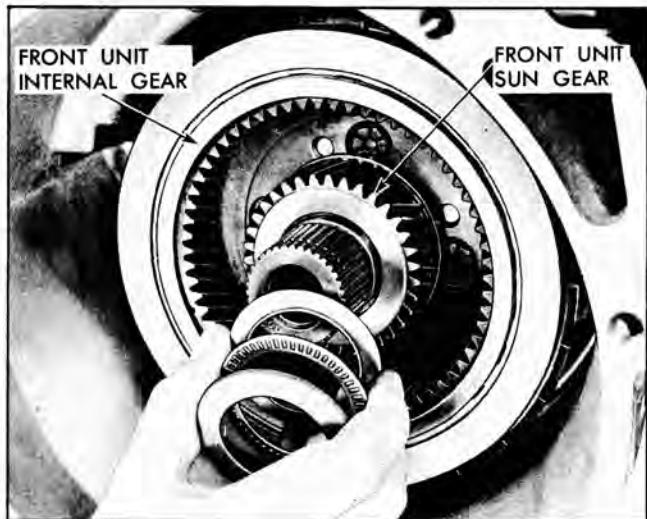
Installing Thrust Bearing and Races on Front Sun Gear
